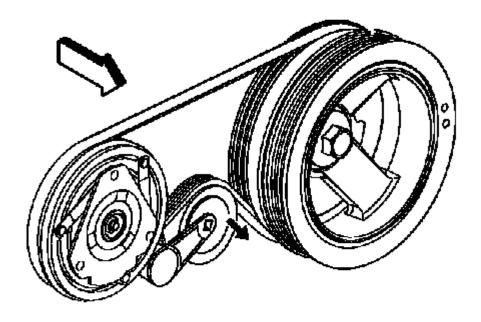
View Of A/C Drive Belt Routing Courtesy of GENERAL MOTORS CORP.
